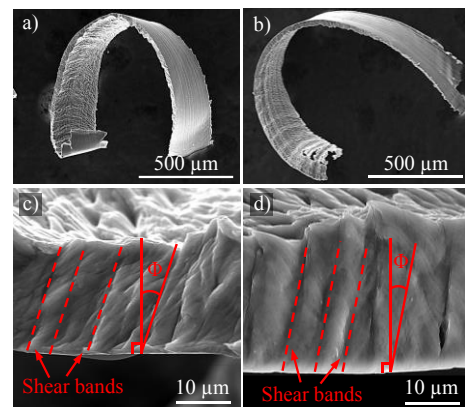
Chip morphology a)-b) and thickness c)-d) at the beginning of the milling tests carried out on the HO sample and VO sample, respectively.
